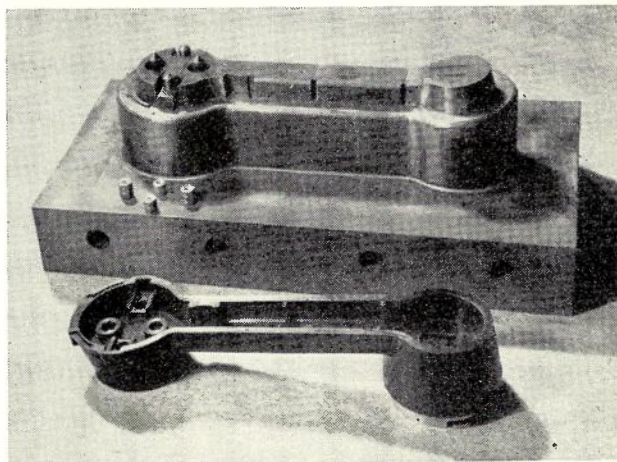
Transmitter and receiver housing component. Top force—completed.
